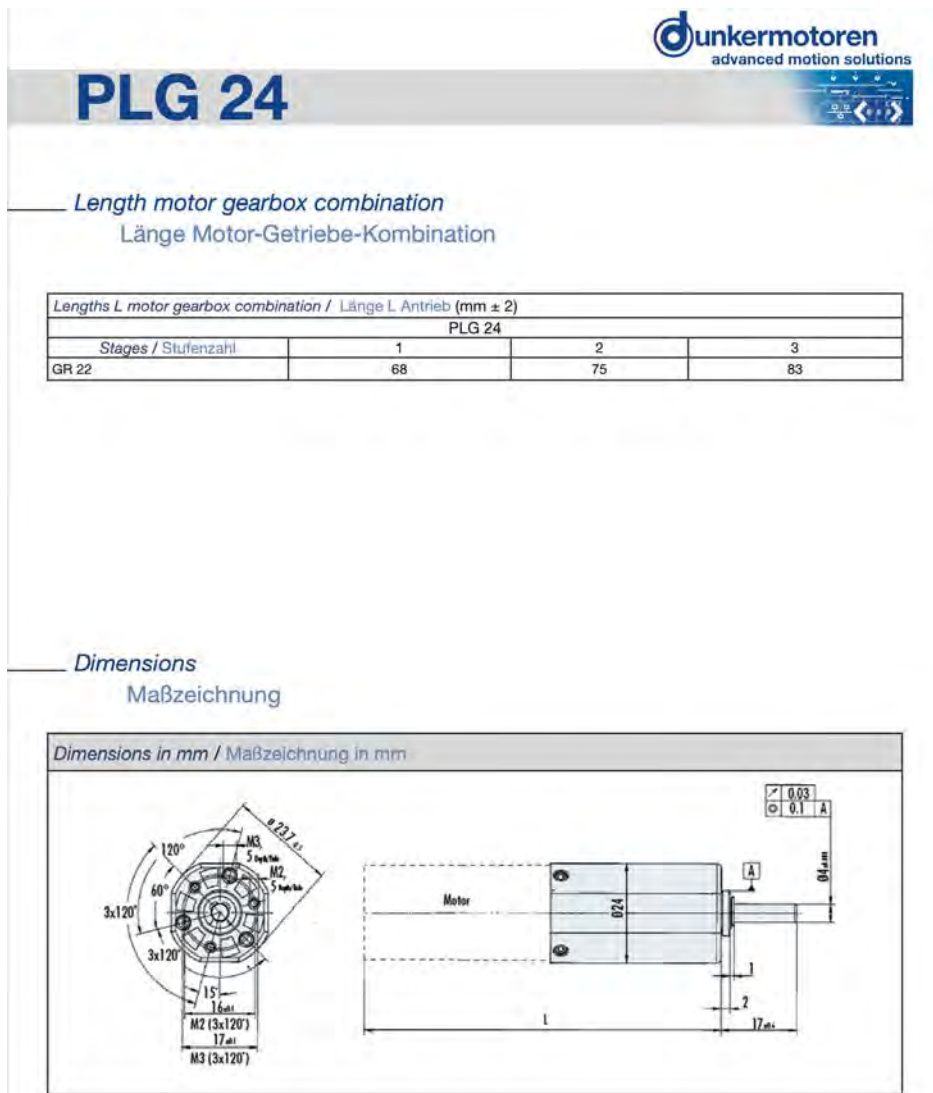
Technical specification and dimensions of the gearbox *PLG 24*.
